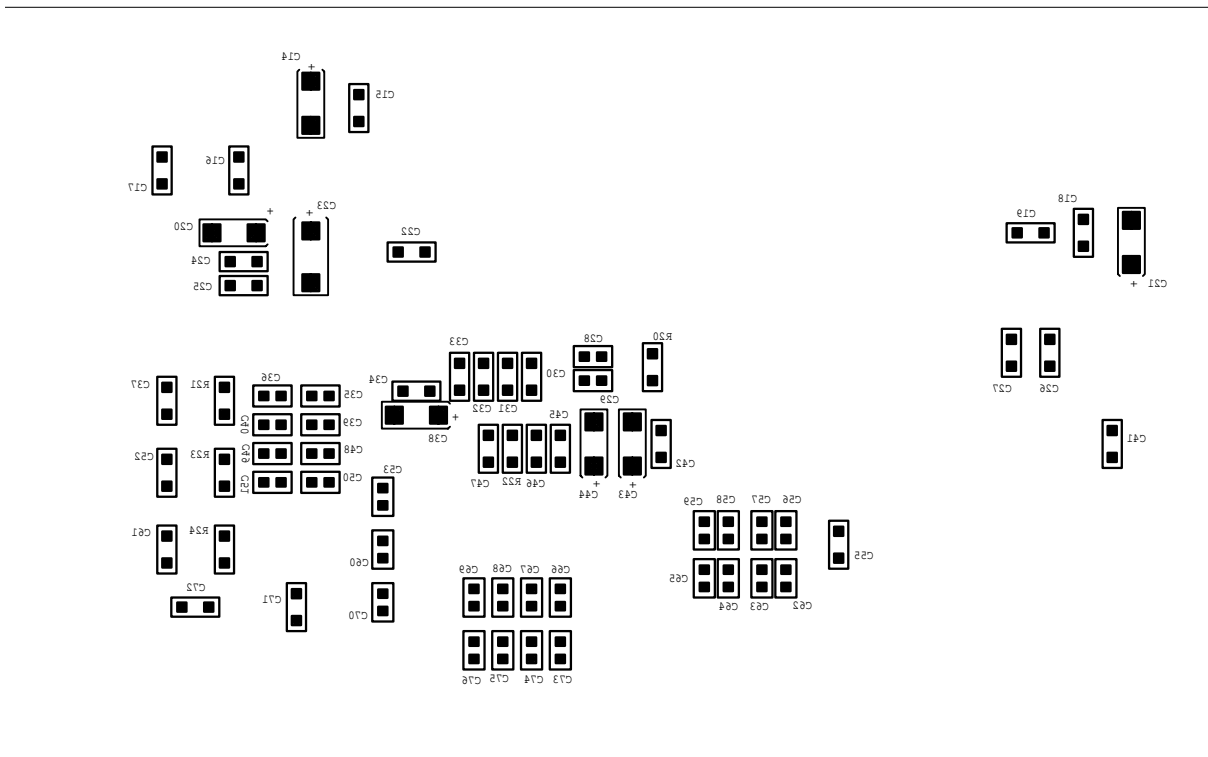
AD7722 Evaluation Board, Solder Side Silkscreen Artwork.
